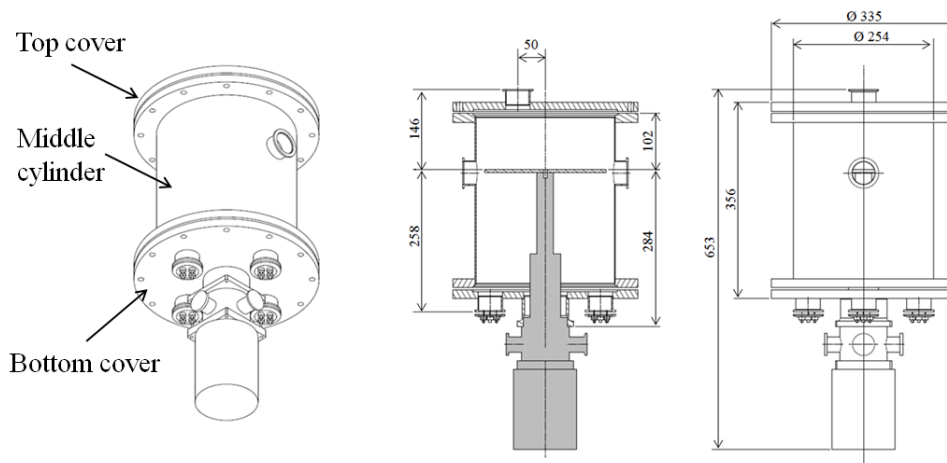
Drawing of the dedicated climatic chamber fit the cold end (design and construction done by LAL mechanical service). We can distinguish three part: top and bottom covers and middle cylinder
